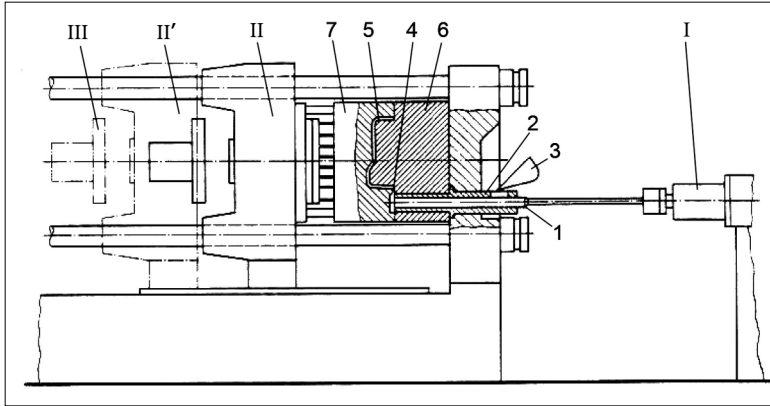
Essential parts of a cold chamber High Pressure Die Casting machine [Stu99]: I. shot unit; 1. plunger; 2. sleeve; 3. ladle; 4. ingate; 5. die cavity; 6. fixed die half; 7. moving die half; II. moving platen in closed position; II'. in open position; and III. ejector unit.
